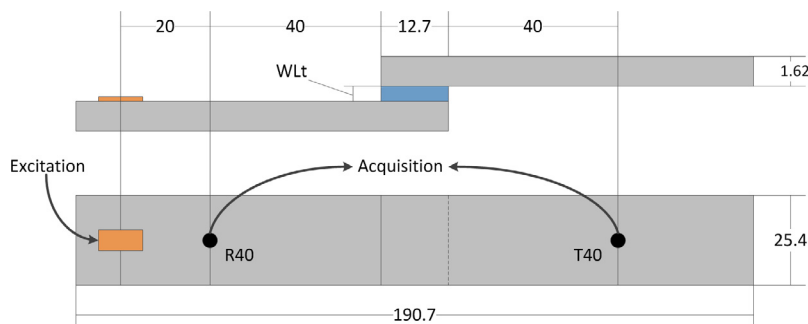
Diagram of the single-lap configuration to be tested, with main nominal dimensions (in millimetres) and transducer positions. Weld-line thickness is denoted by WLT.
